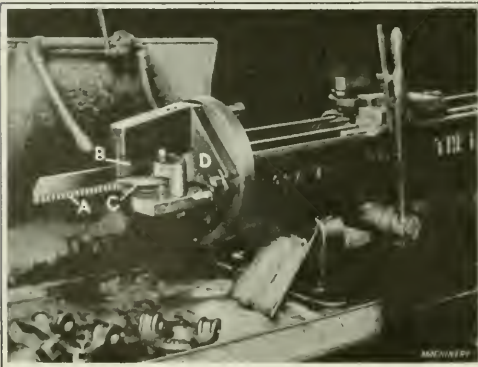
Broaching Chaser Slots in Die-heads of the Type shown in Fig. 3
